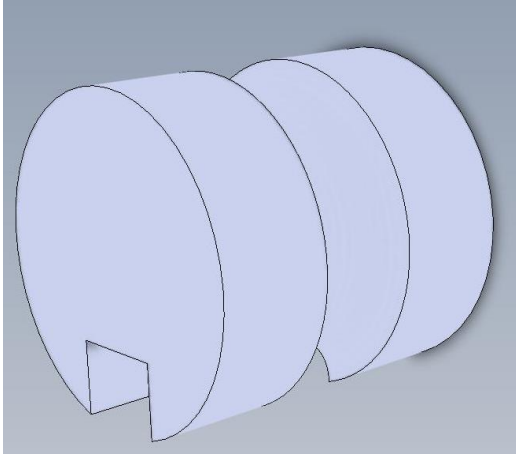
CAD Drawing for "Anvil" Support for M8 Bars
